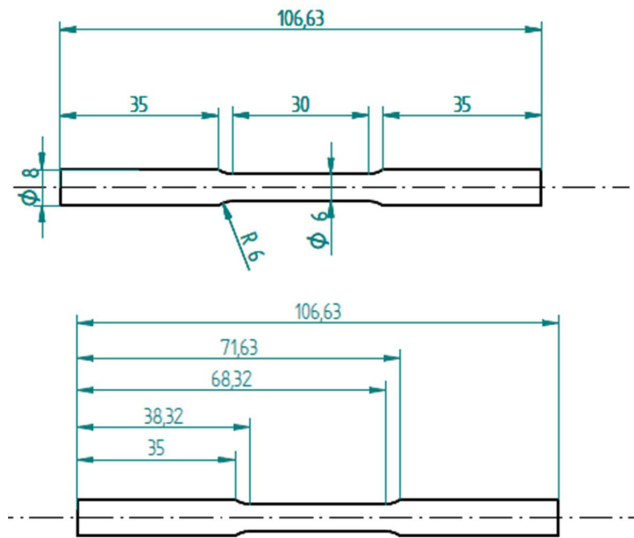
Technical drawing of the round bar tensile testing specimen.
